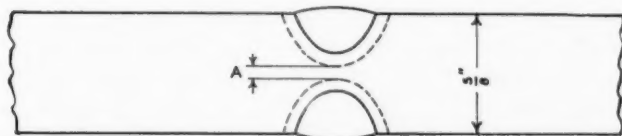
Cross section of stainless steel weld shown in Fig. 6. "A" is place where lack of fusion occurred.
